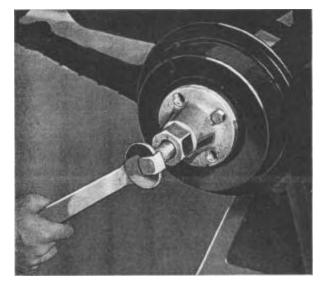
Removing Rear Wheel Hub J-446—Wheel Puller—1934-5 Terraplane and Short W. B. Hudson J-350—Wheel Puller—1934-5 Long W. B. Hudson J-736—Wheel Puller—1936-7 All Terraplane and Hudson
